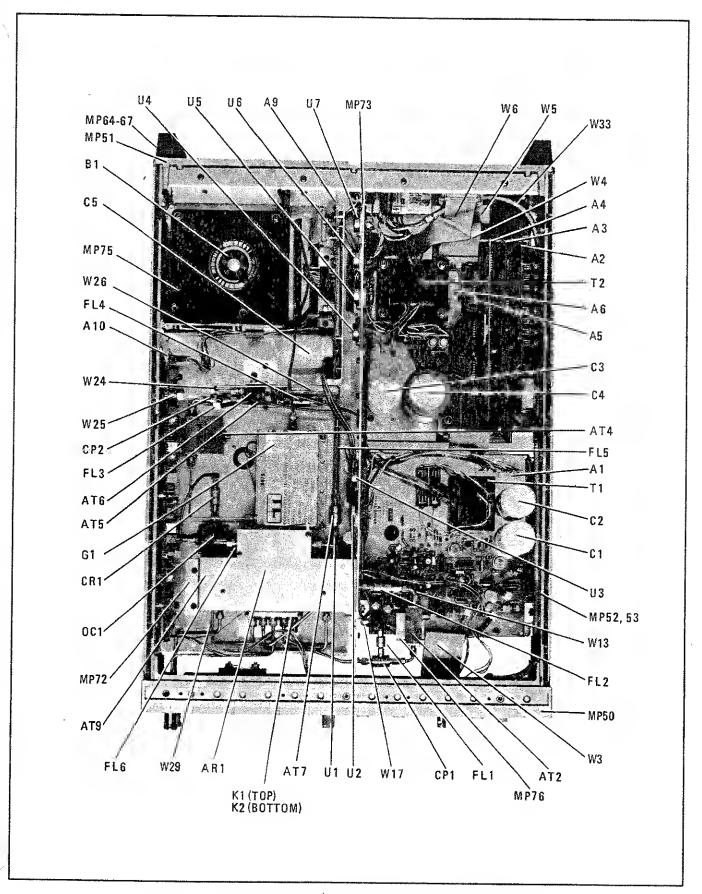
FEU Top Chassis Parts, Mechanical Parts and Cable Identification
